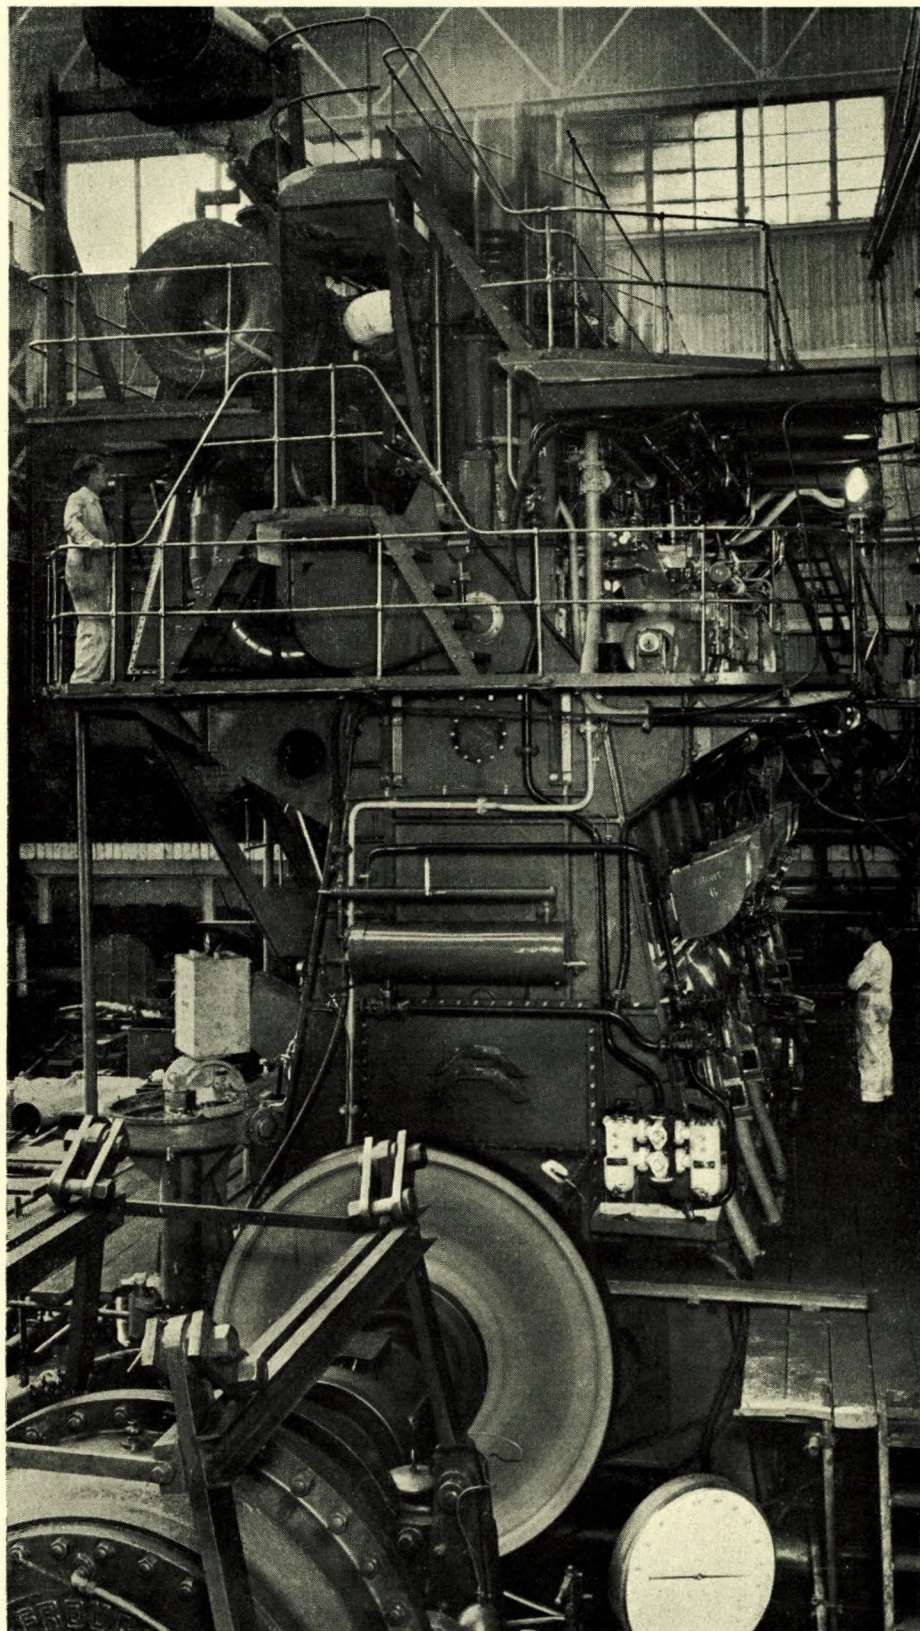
5,800 b.h.p. engine running at 118 r.p.m.; 15-sec. exposure of photographic plate
